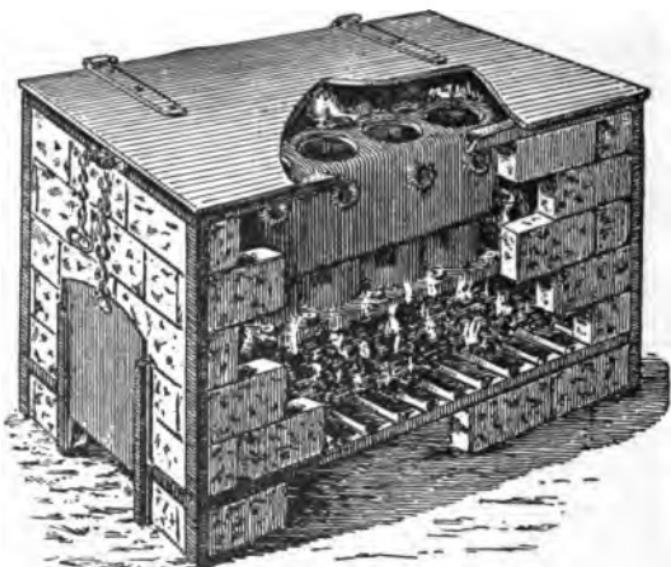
Workshop Oven for the Repairing and Welding of Articles of Cast Iron and Aluminum
